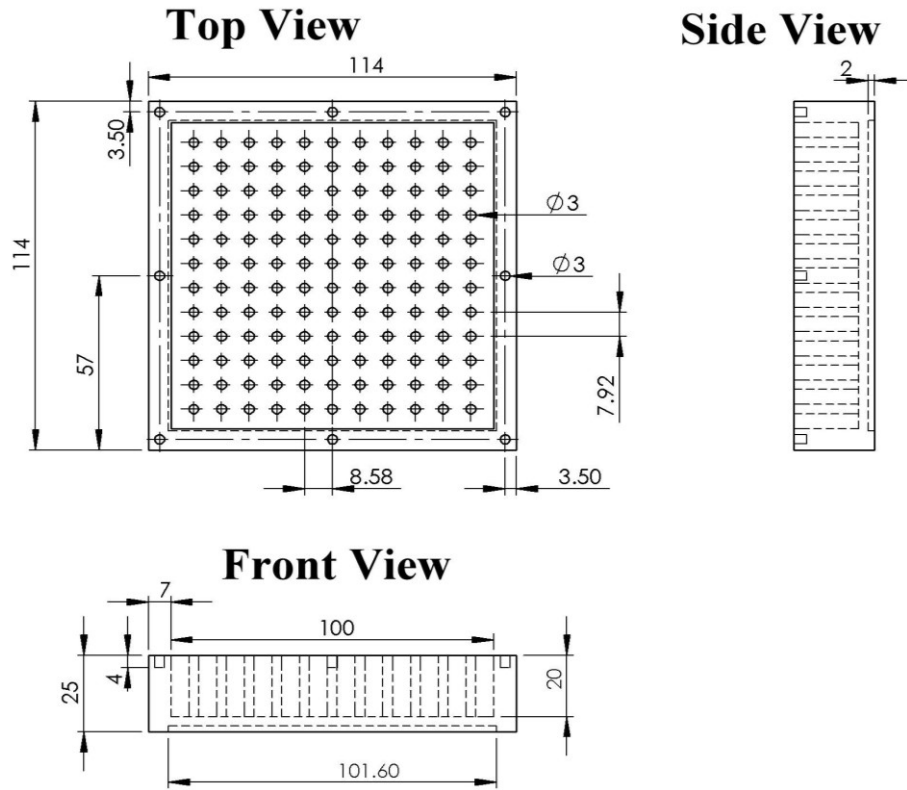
Two dimensional projections of 3mm pin diameter heat sink.
